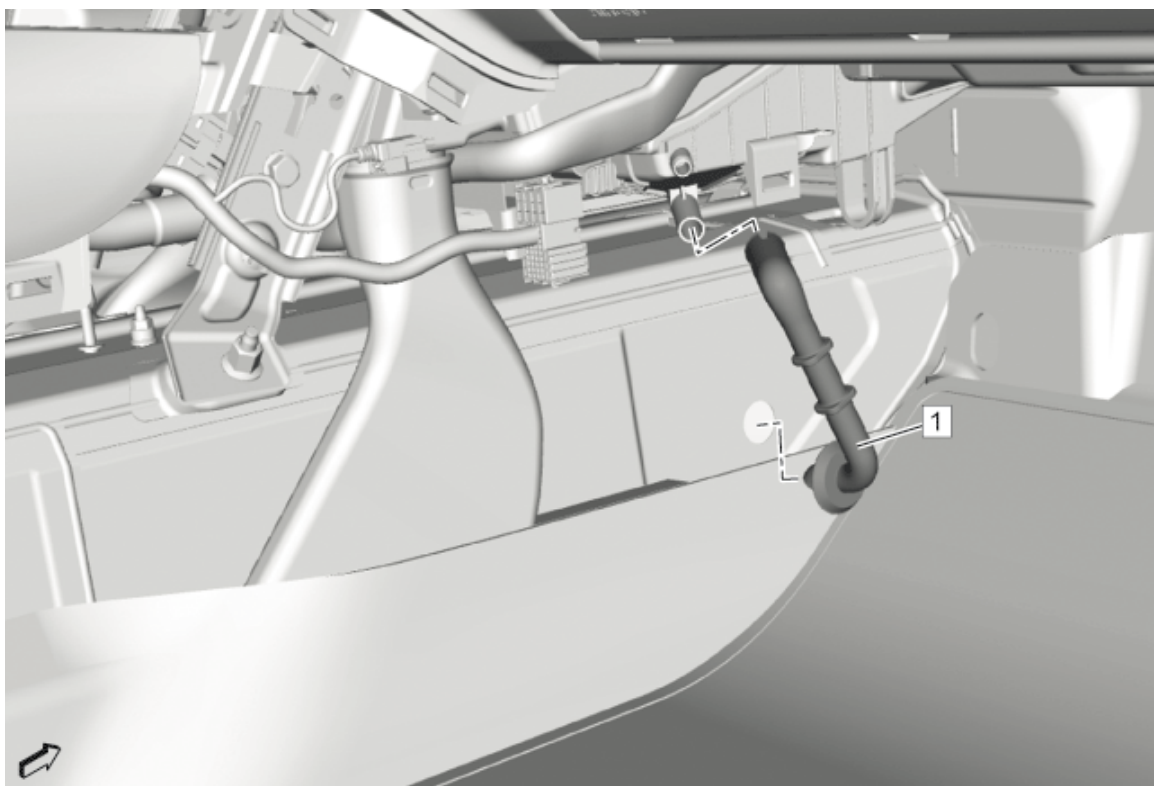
Air Conditioning Evaporator And Blower Module Drain Hose
